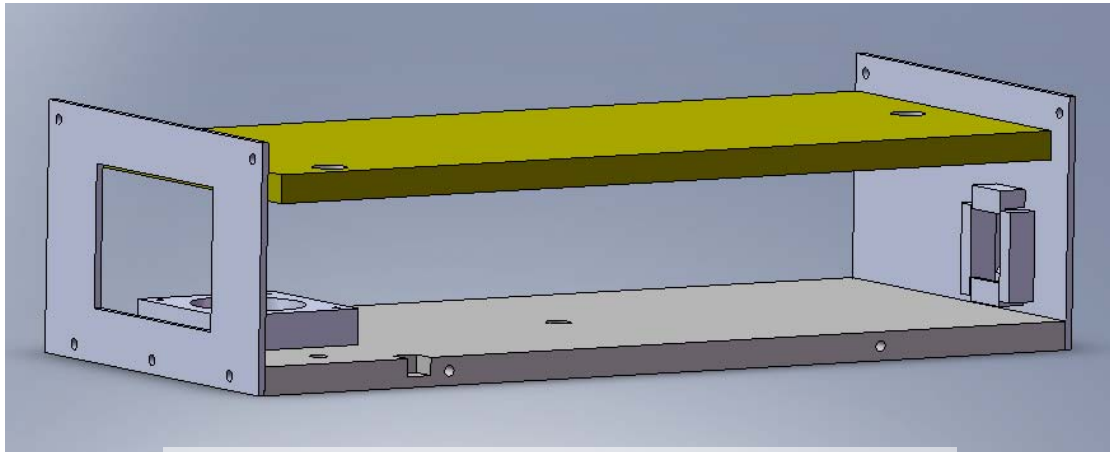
The STM frame.(The disk scanner, sample stage, screws, springs, and connection wires are omitted.)
